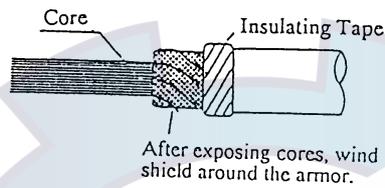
Fabricating cable 00-8016-038-313-761HV
